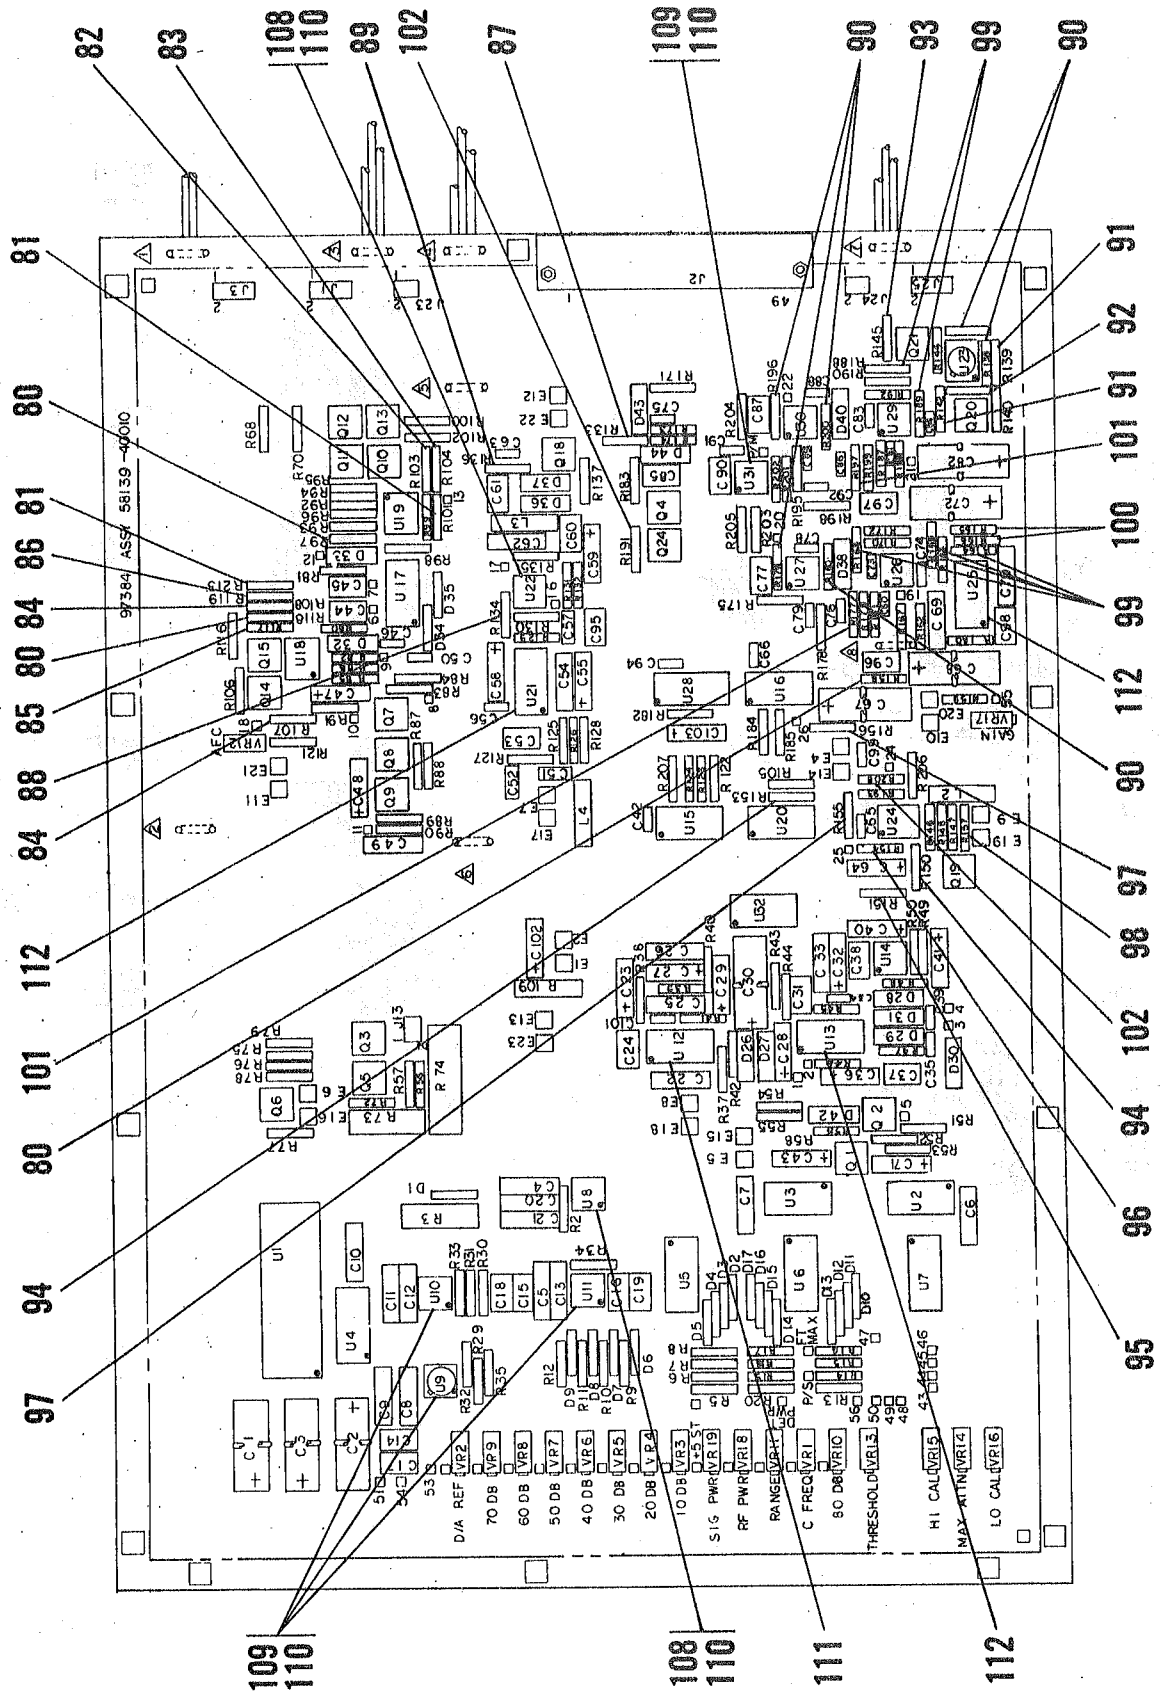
Circuit Card Assembly, Microwave Interface (Sheet 6 of 7)
